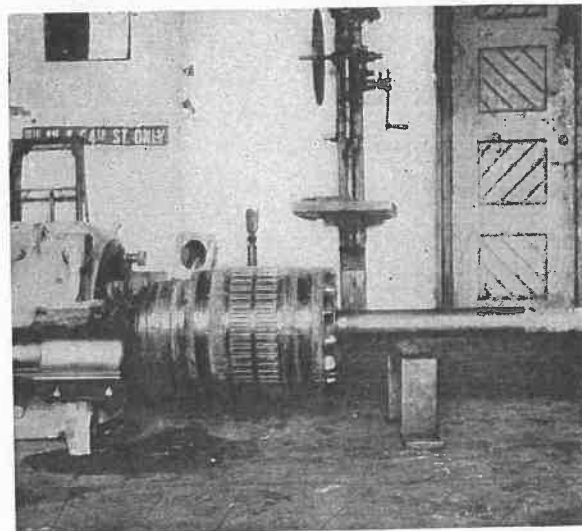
The other end of shaft than that shown in Fig. 9 supported by an oak pole with a steel tube fitting over the shaft
